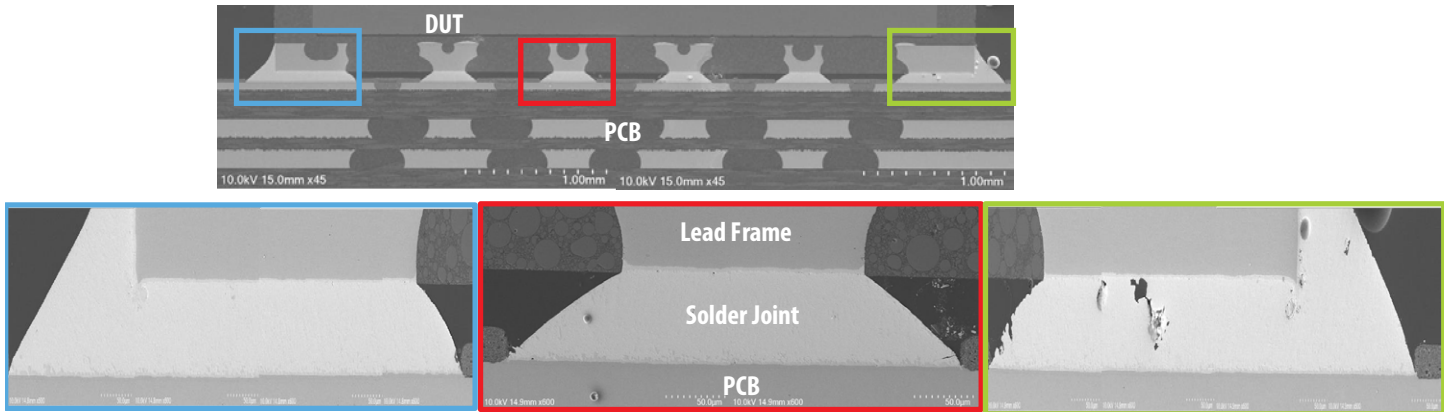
Cross-sectional analysis of a GaN device solder joint after 2,000 hours of testing on an eight-layer PCB. The magnified views confirm the absence of fatigue cracking in the left corner (blue), right corner (green), and center (red) regions, demonstrating the mechanical integrity of the interconnects under prolonged power cycling.
